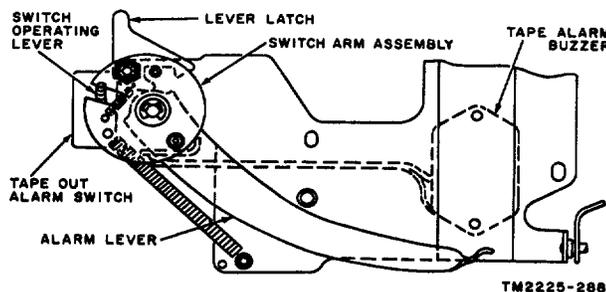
Tape-out alarm mechanism (All models except TT-76/GGC).
